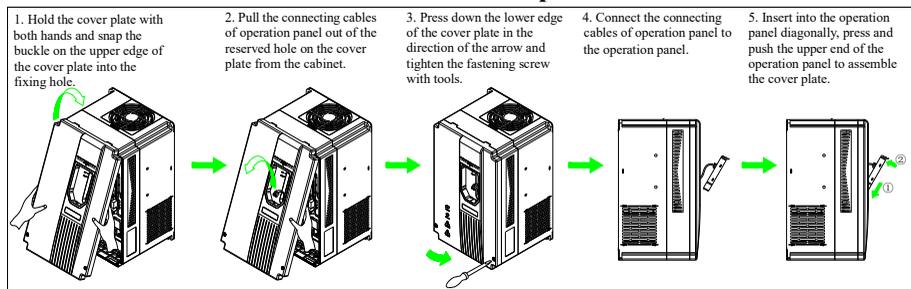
Steps for Disassembly and Installation of Cover Plate of Hope530G11T4~Hope530G37T4 Models
